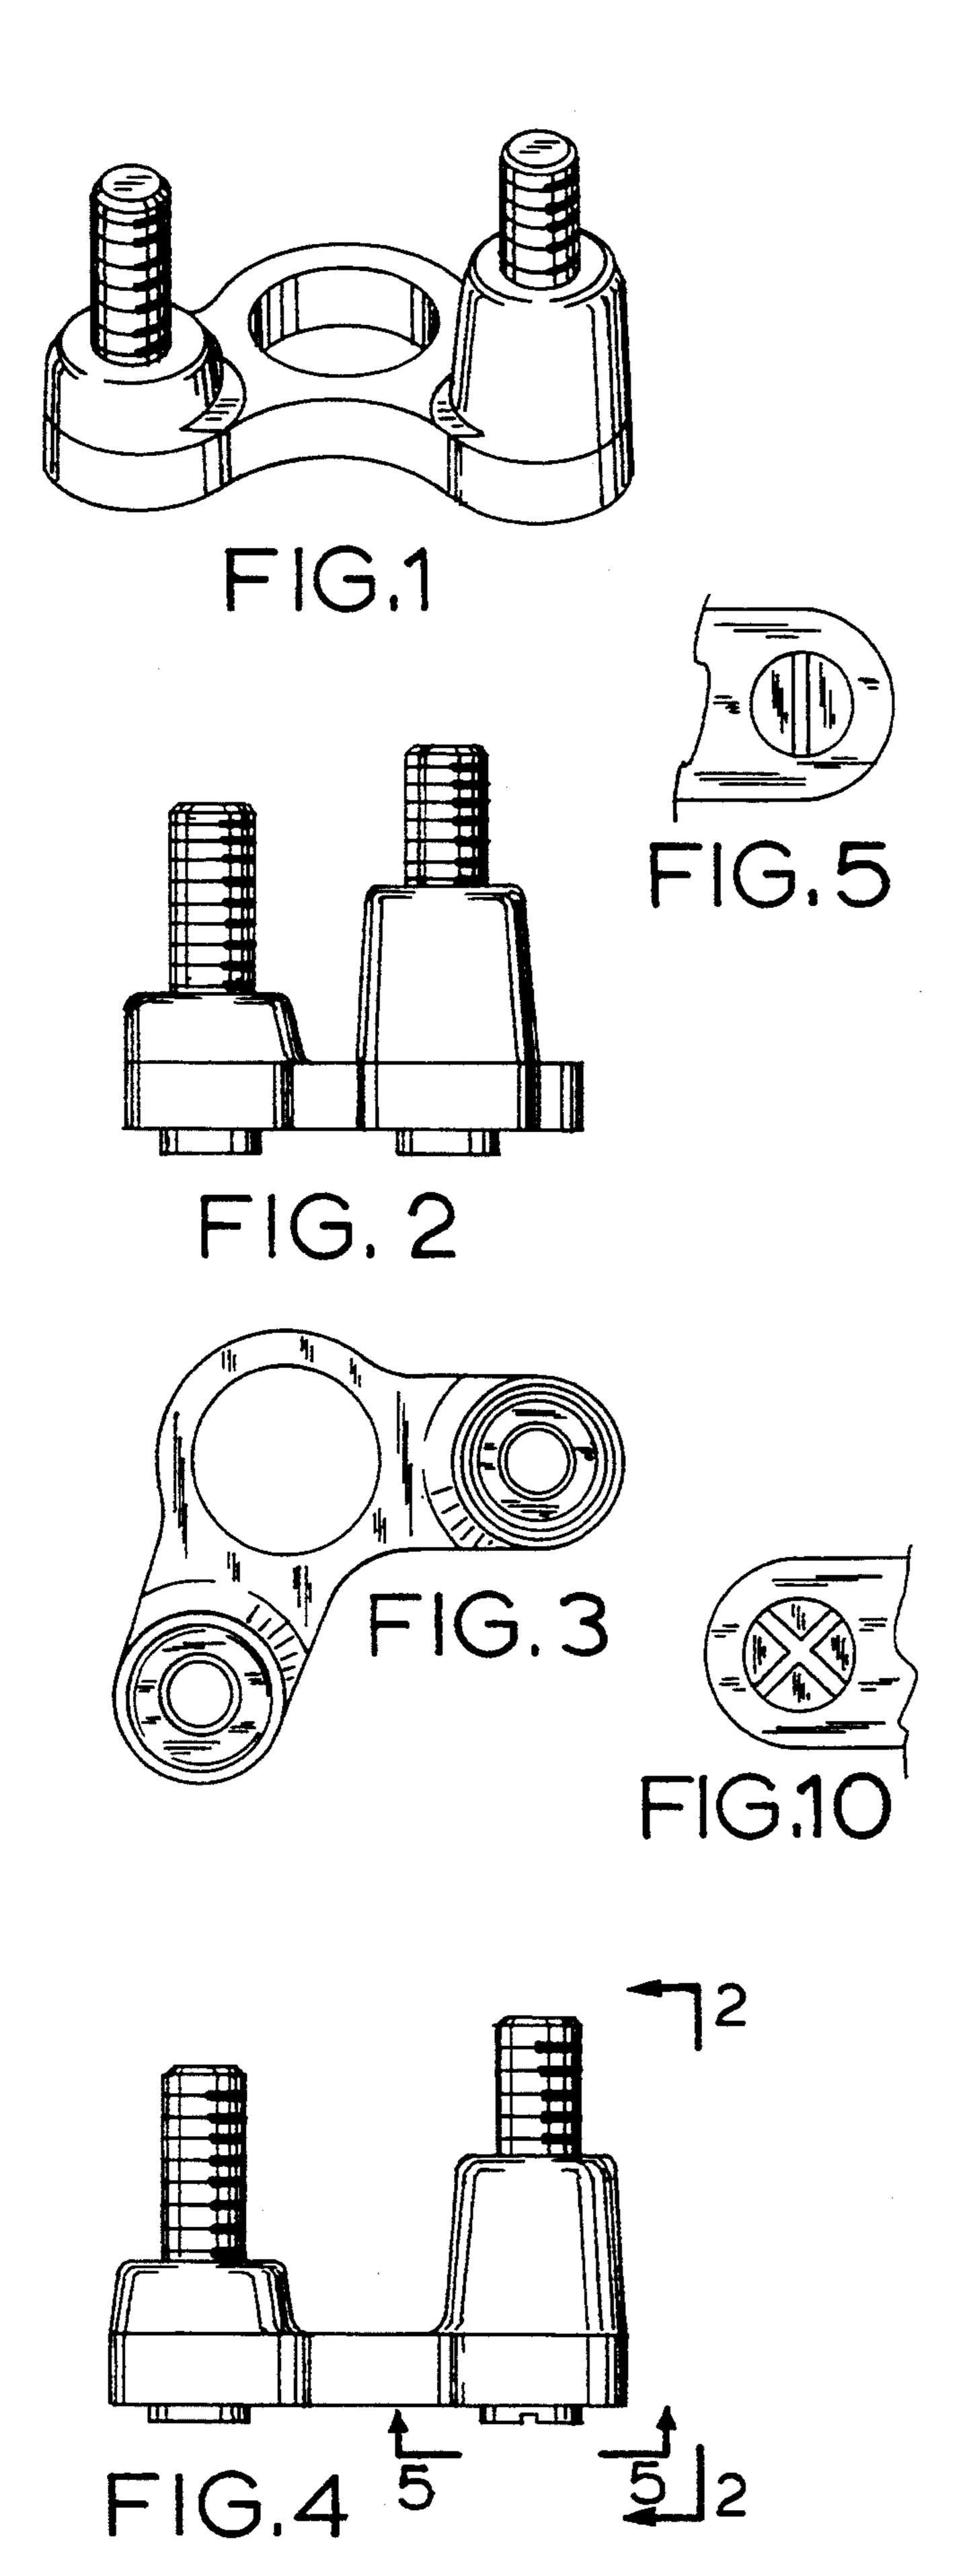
is a bottom cutaway view taken at 10—10 of FIG. 9; and,
